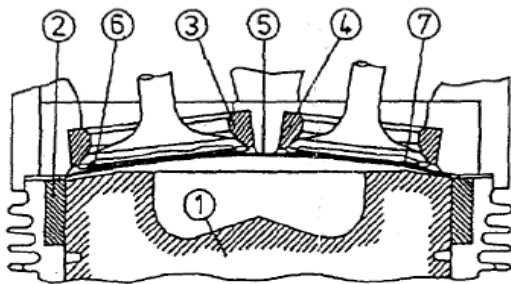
Potential thermal barrier coated components in a diesel engine combustion chamber
